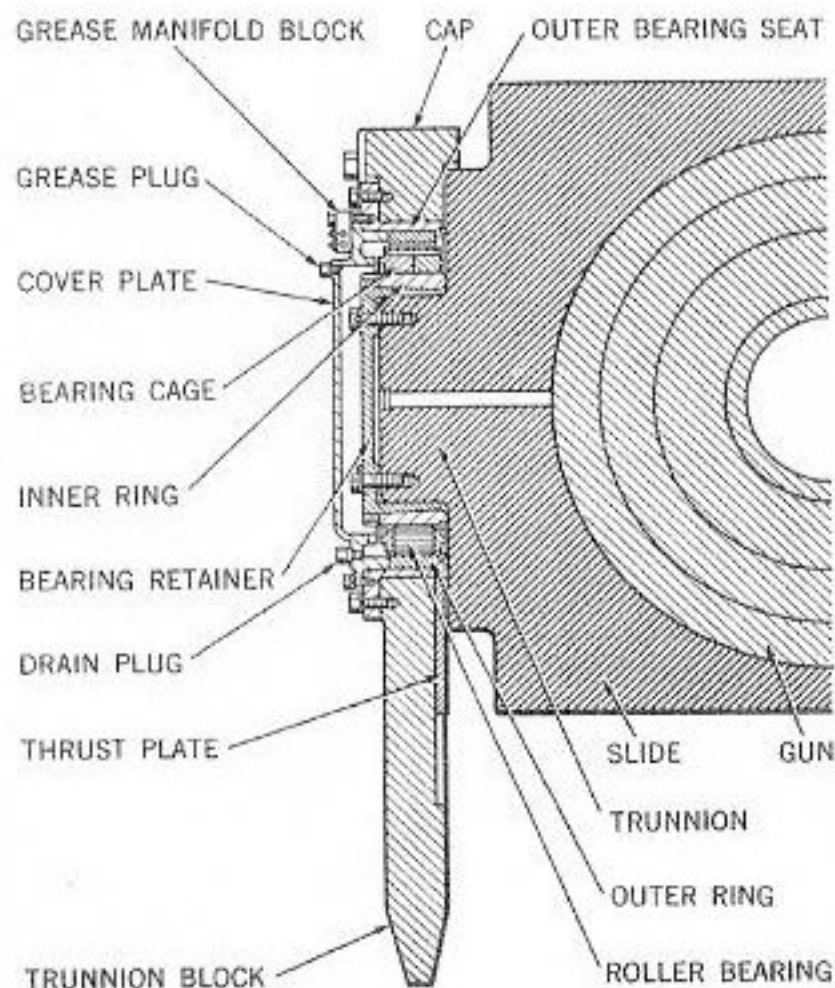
Deck Lug Mk 7 Mod 0, Gun Mk 7 Mod 0, and Slide Mk 6 Mod 0, Sectional View
